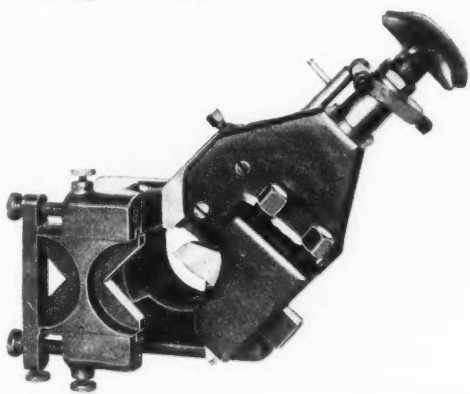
Standard Turning Tool for Bar Stock and Forgings.
